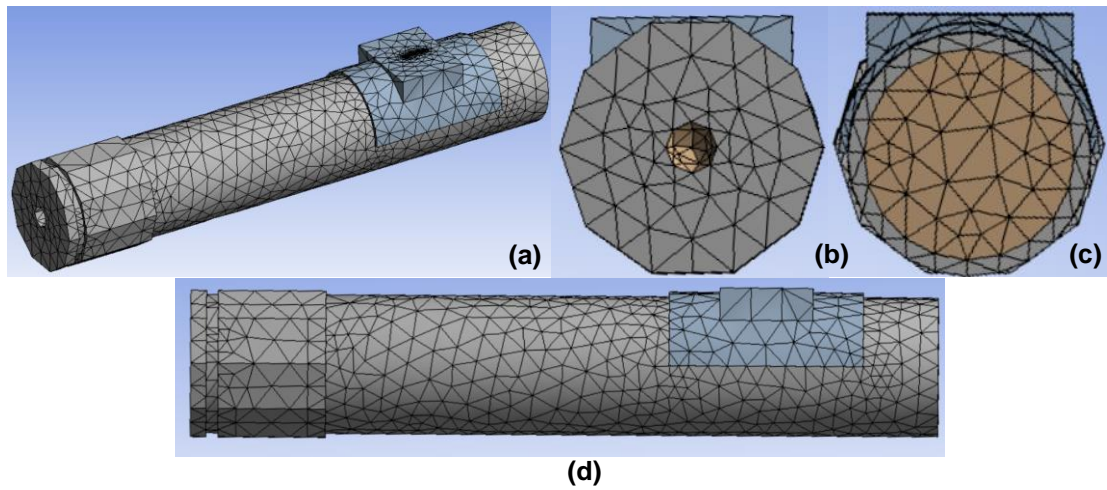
(a) Isometric View (b) Front View (c) Back View (d) Side View
